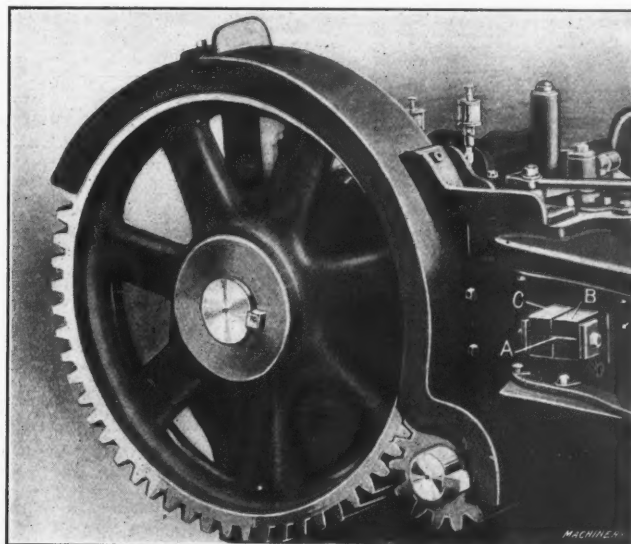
Ajax Upsetting and Forging Machine showing Safety or Shear Bolt, providing a Safety Relief for the Gripping Dies
